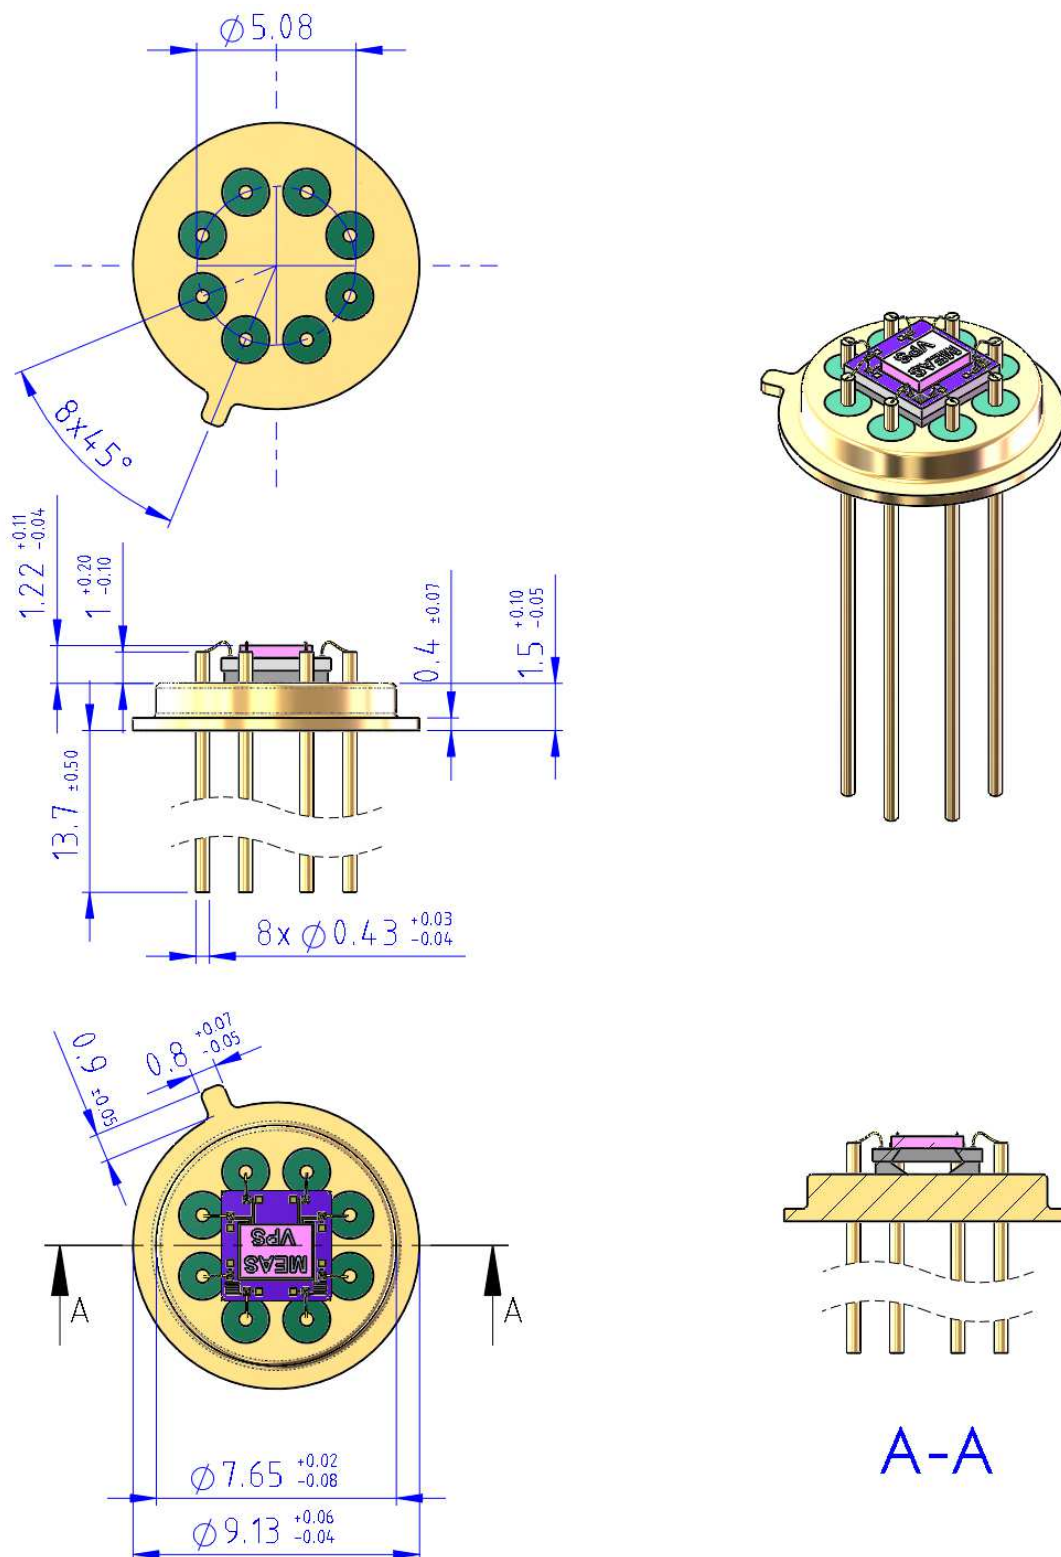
Mechanical dimensions of sensor – all dimensions in mm
